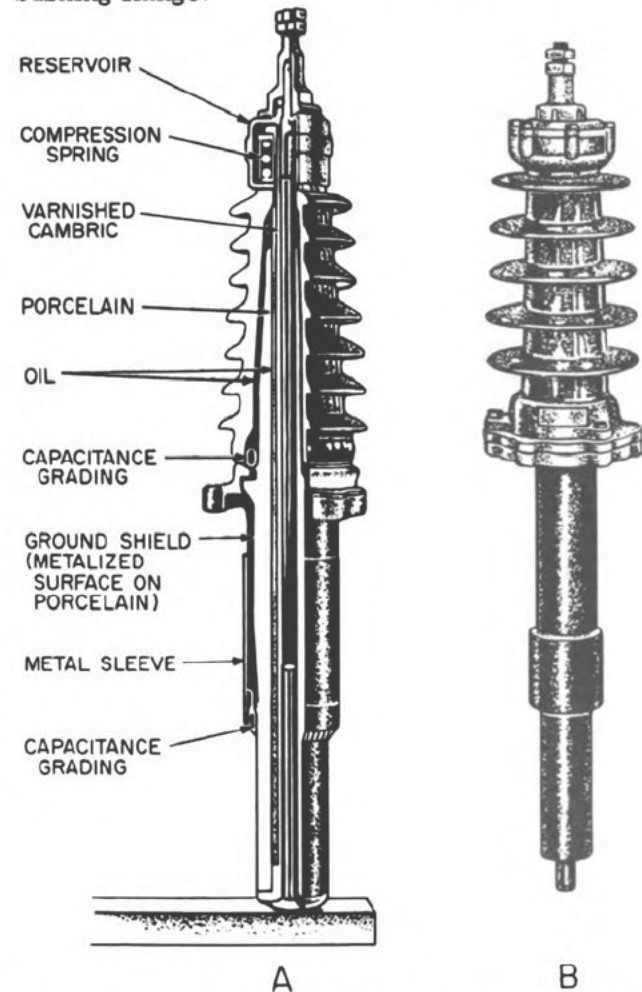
Bushings: A, L type; B, S type, with 2-piece cap and 2-piece support flange.
